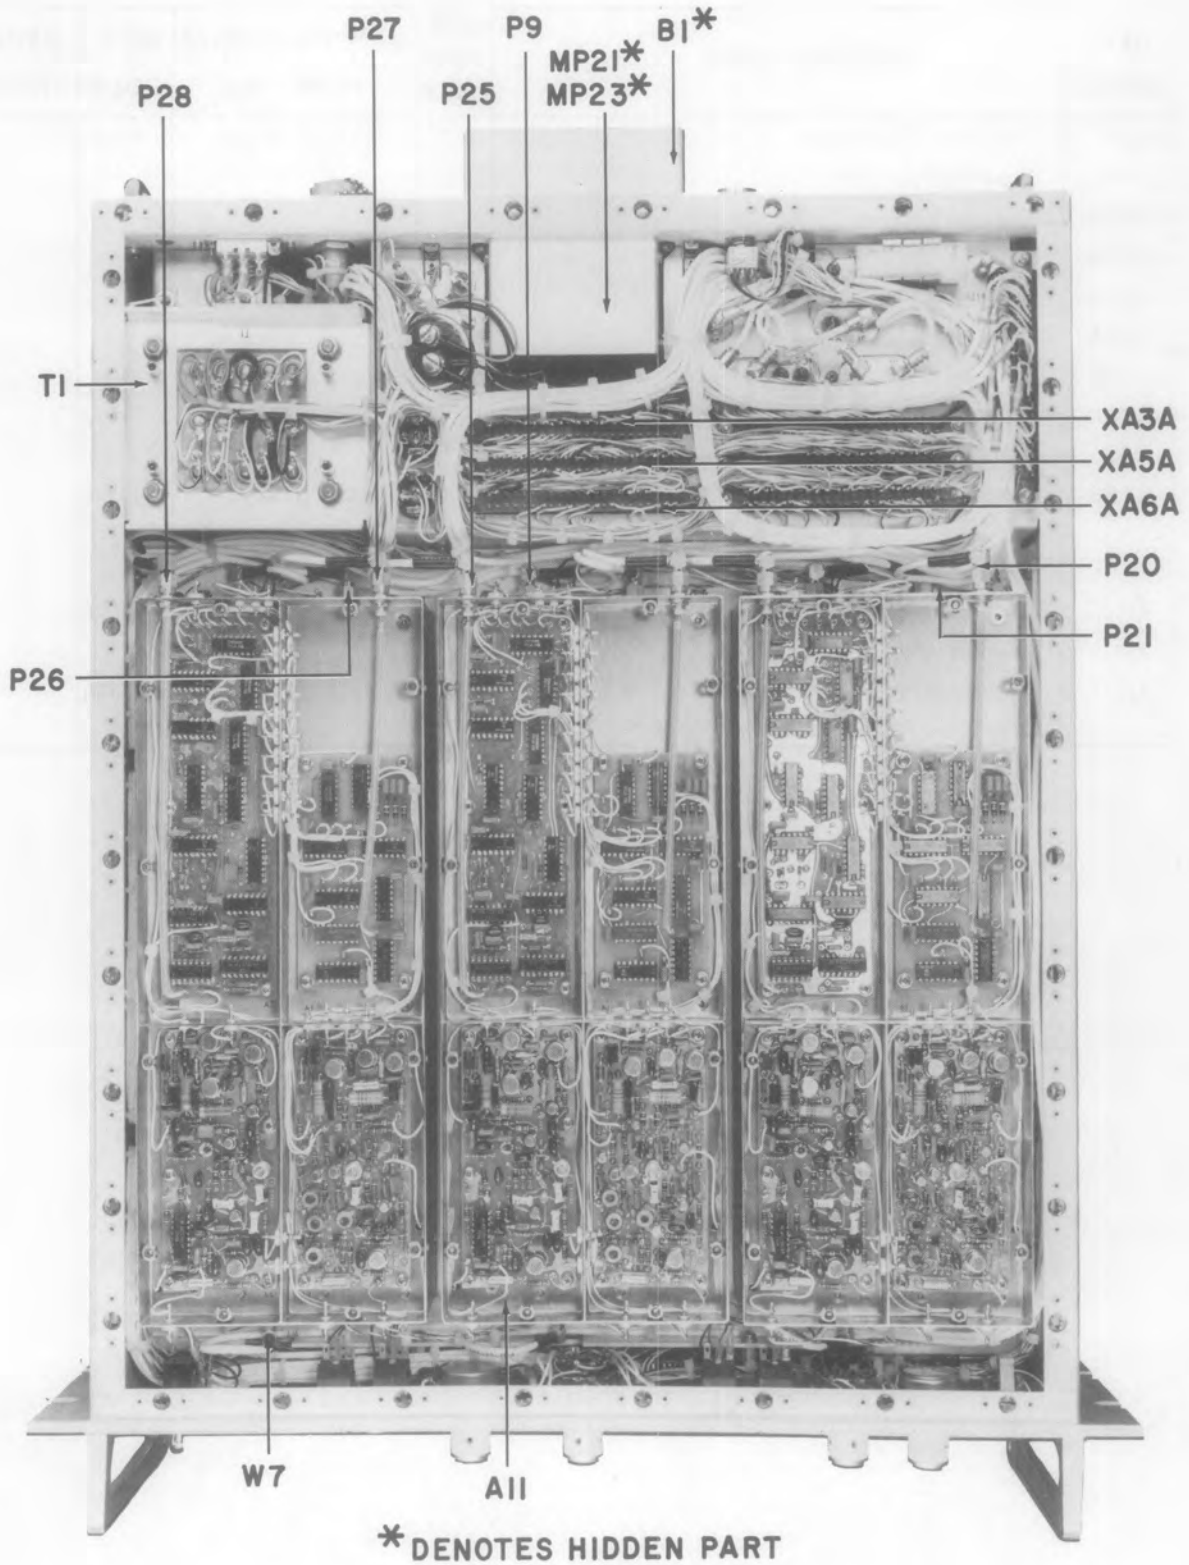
Type WJ-9518/9518E Demodulator Bottom View, Location of Components
